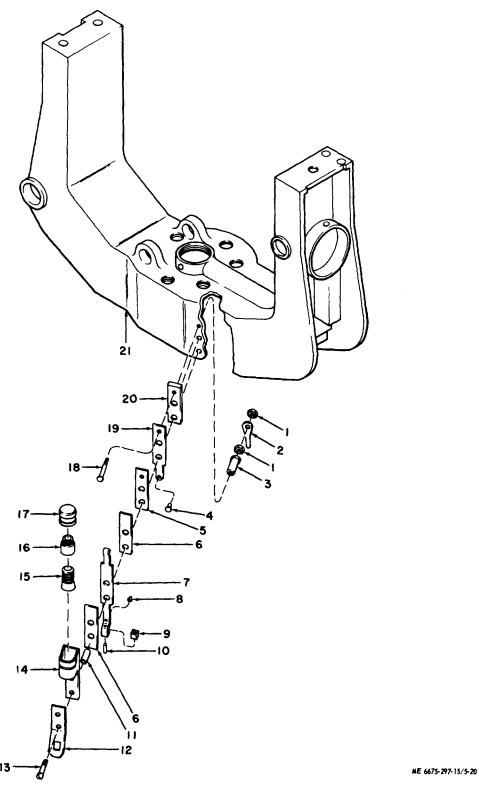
U-frame and electrical parts; removal, disassembly, reassembly, and installation.
